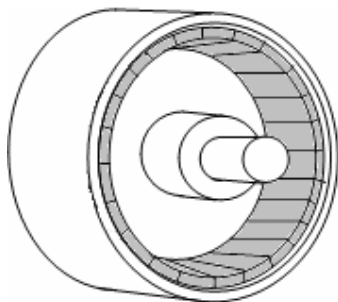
Stator and rotor of an outer rotor PM motor [NTNU].
